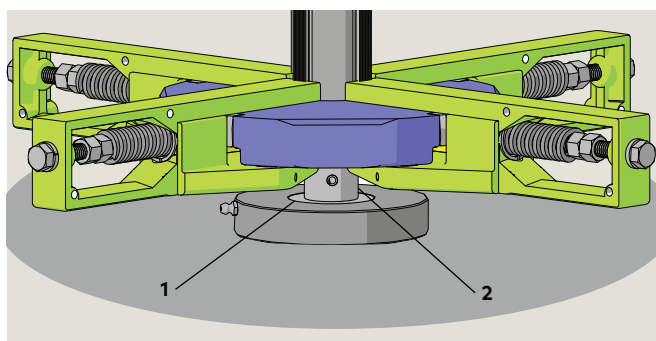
Center shaft bottom plug installed in floor pivot
